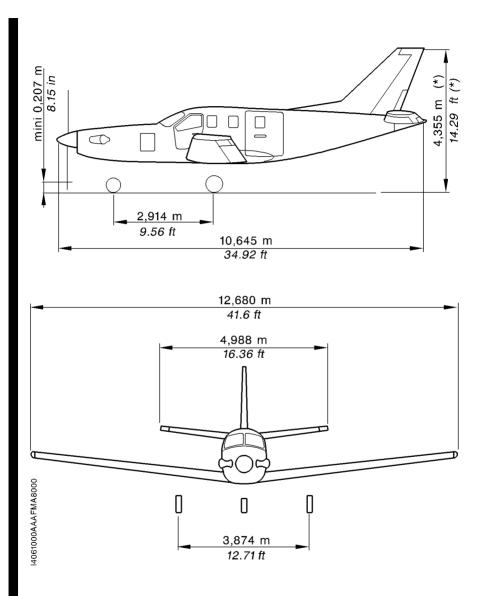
(1 / 2) - THREE VIEW DRAWING - TBM700A
